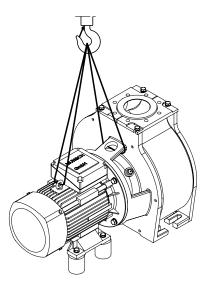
Fastening the lifting gear to the pump unit without base plate
